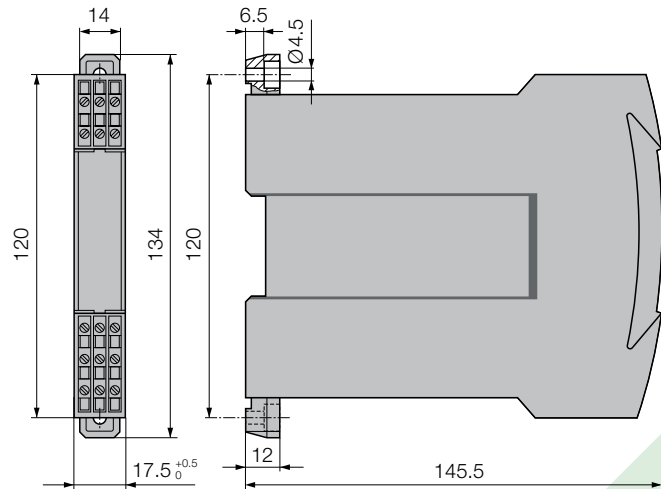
SINEAX TV 808 in housing S17, screw hole mounting brackets pulled out.
